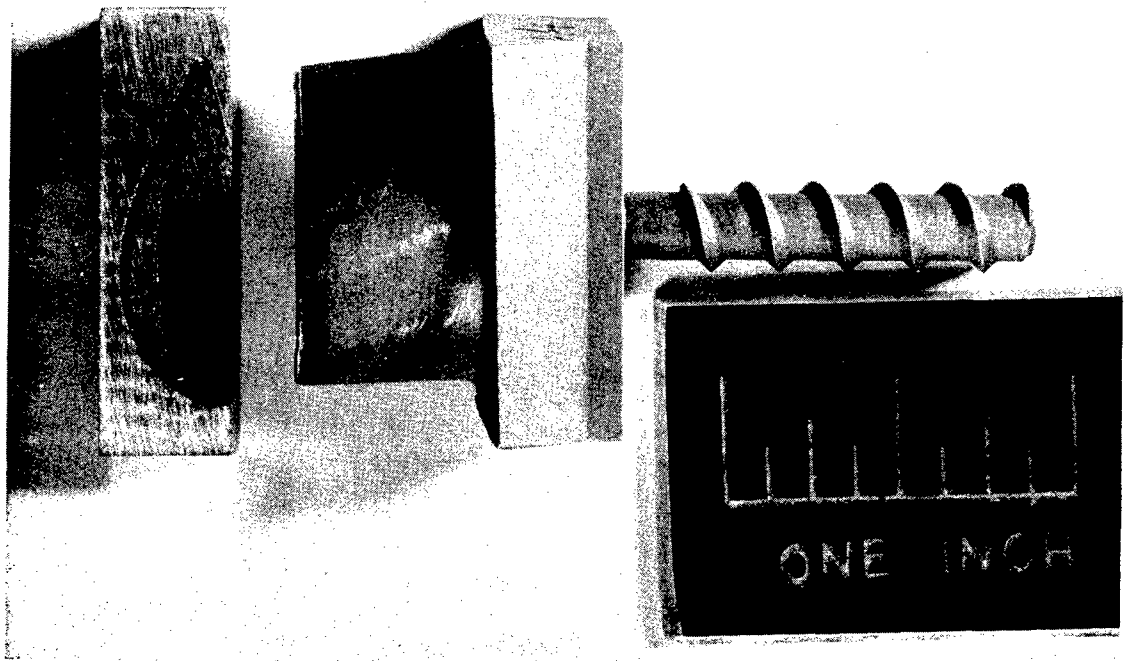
Cast Cooled Blade, Part No. 709627, With Tip-Cap - EDM With Carbon Roughing Tool.
